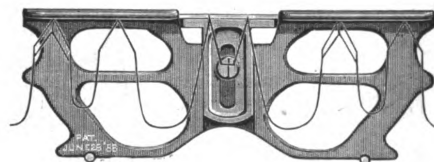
Broken View, Showing Valve Arrangement.
